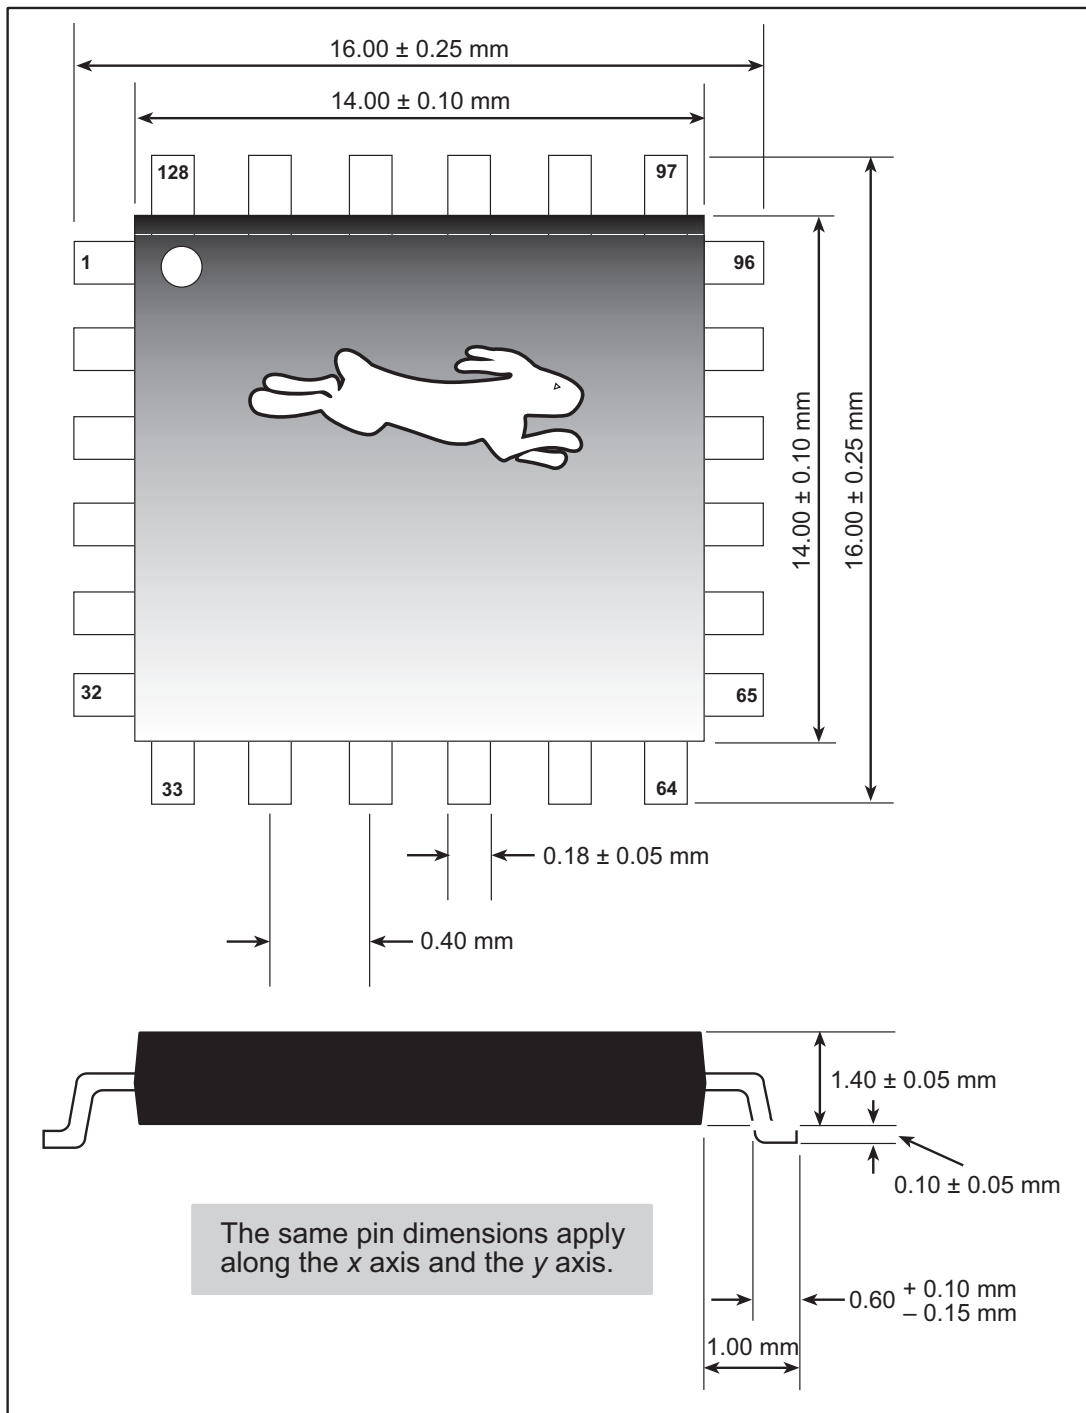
Mechanical Dimensions Rabbit LQFP Package
